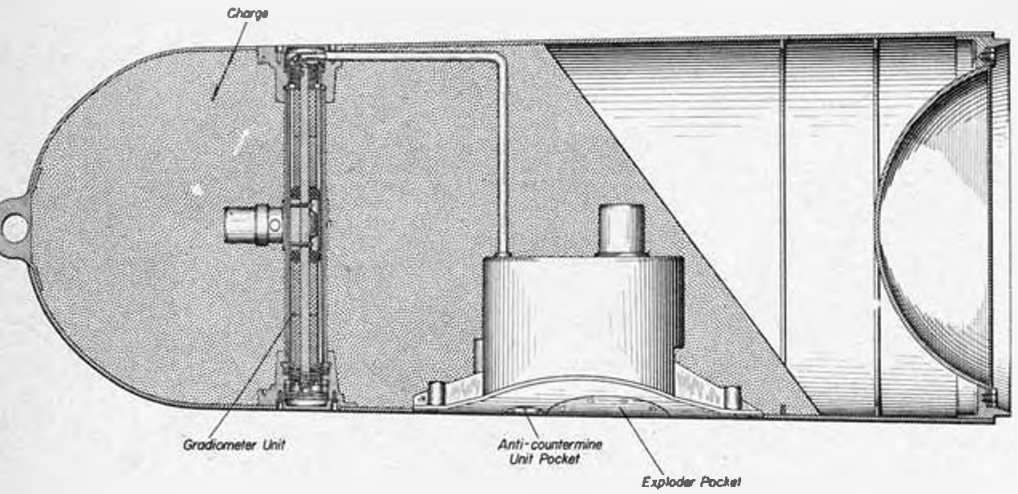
Mk 9 Exploder in Mk 13-4 Warhead, Sectional View
